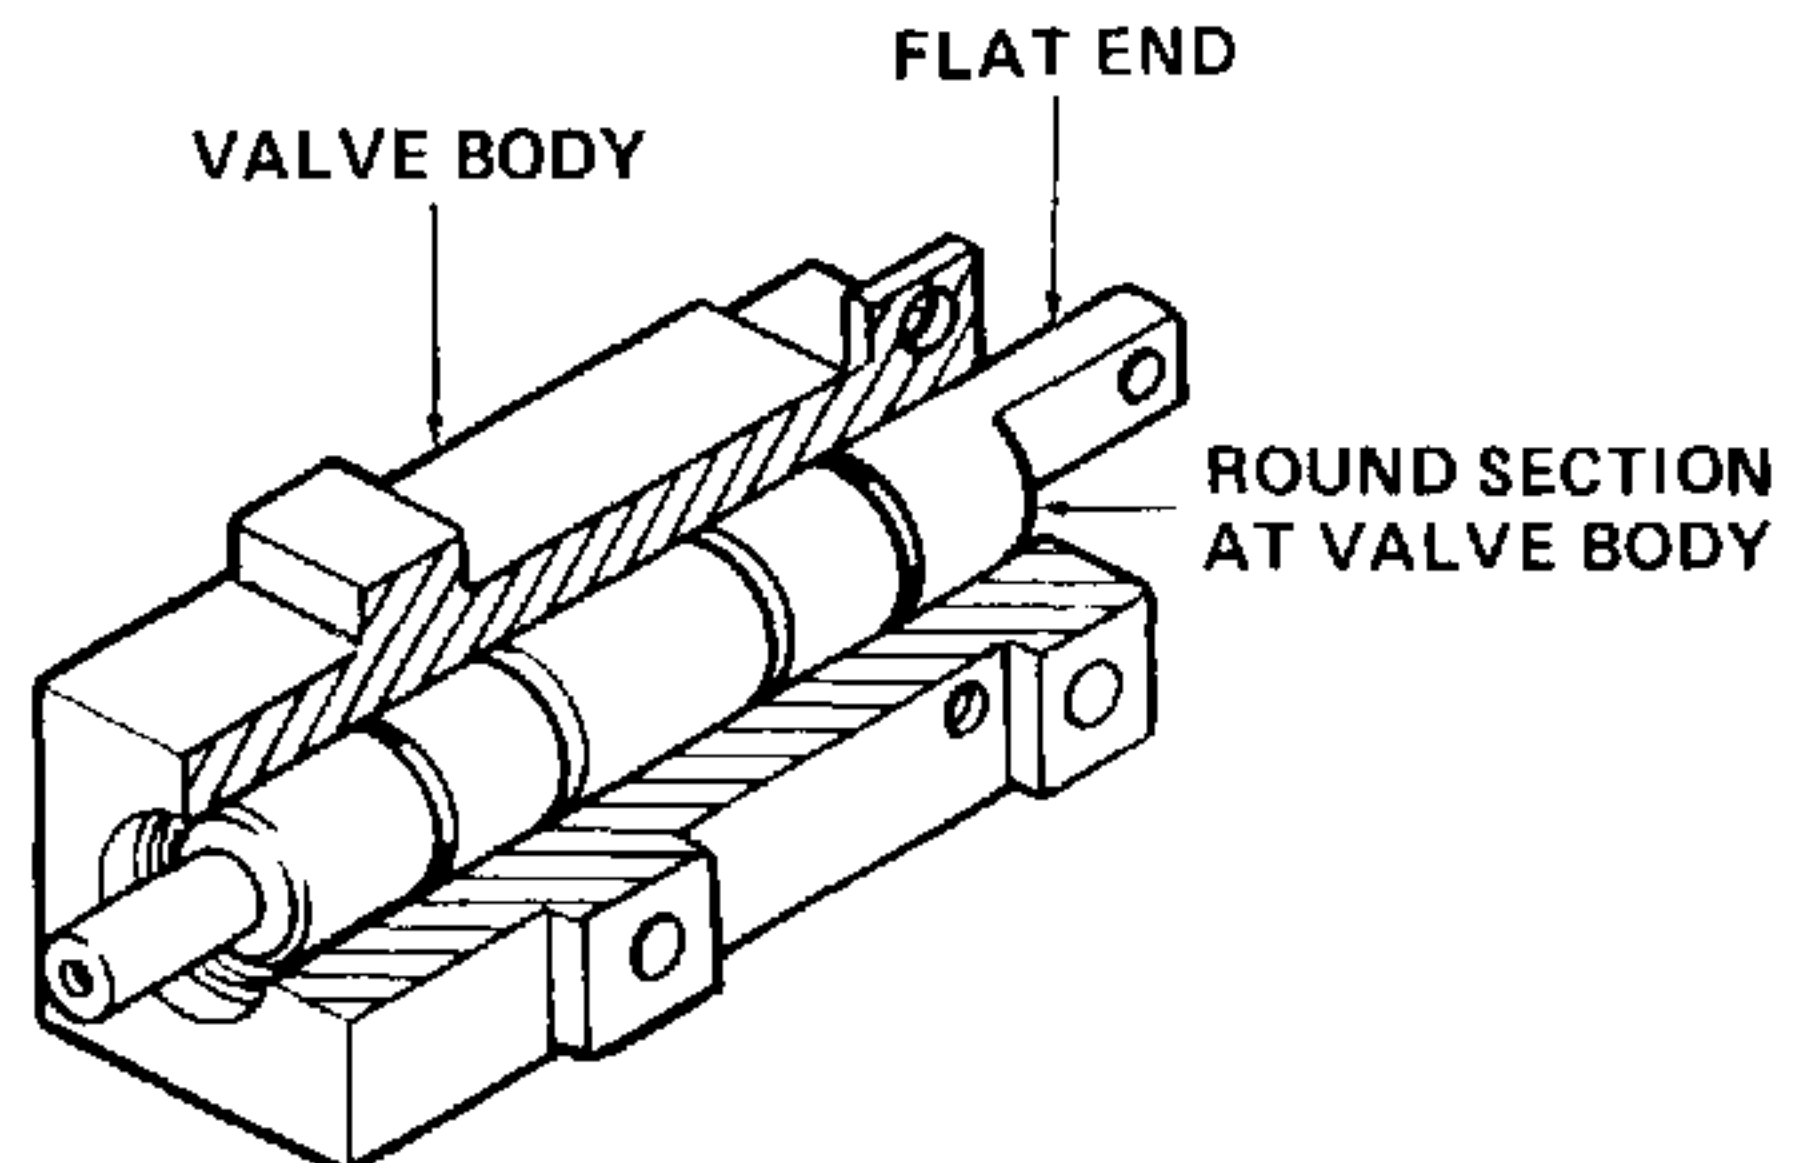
A. Valve Shaft Correctly Positioned in Valve Body.
